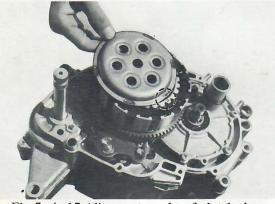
Alignment marks of clutch sleeve hub and clutch pressure plate
